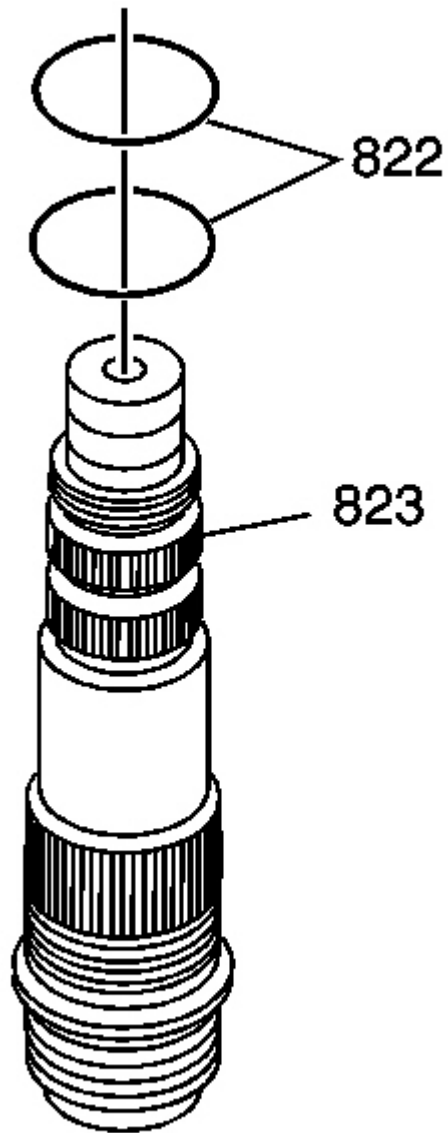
3rd Clutch Housing Fluid Passage O-Ring Seals & 3rd Clutch Shaft
